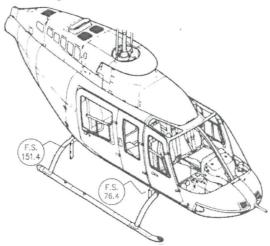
Quick Release Mounting Provisions 70102 / 70202 Configuration
